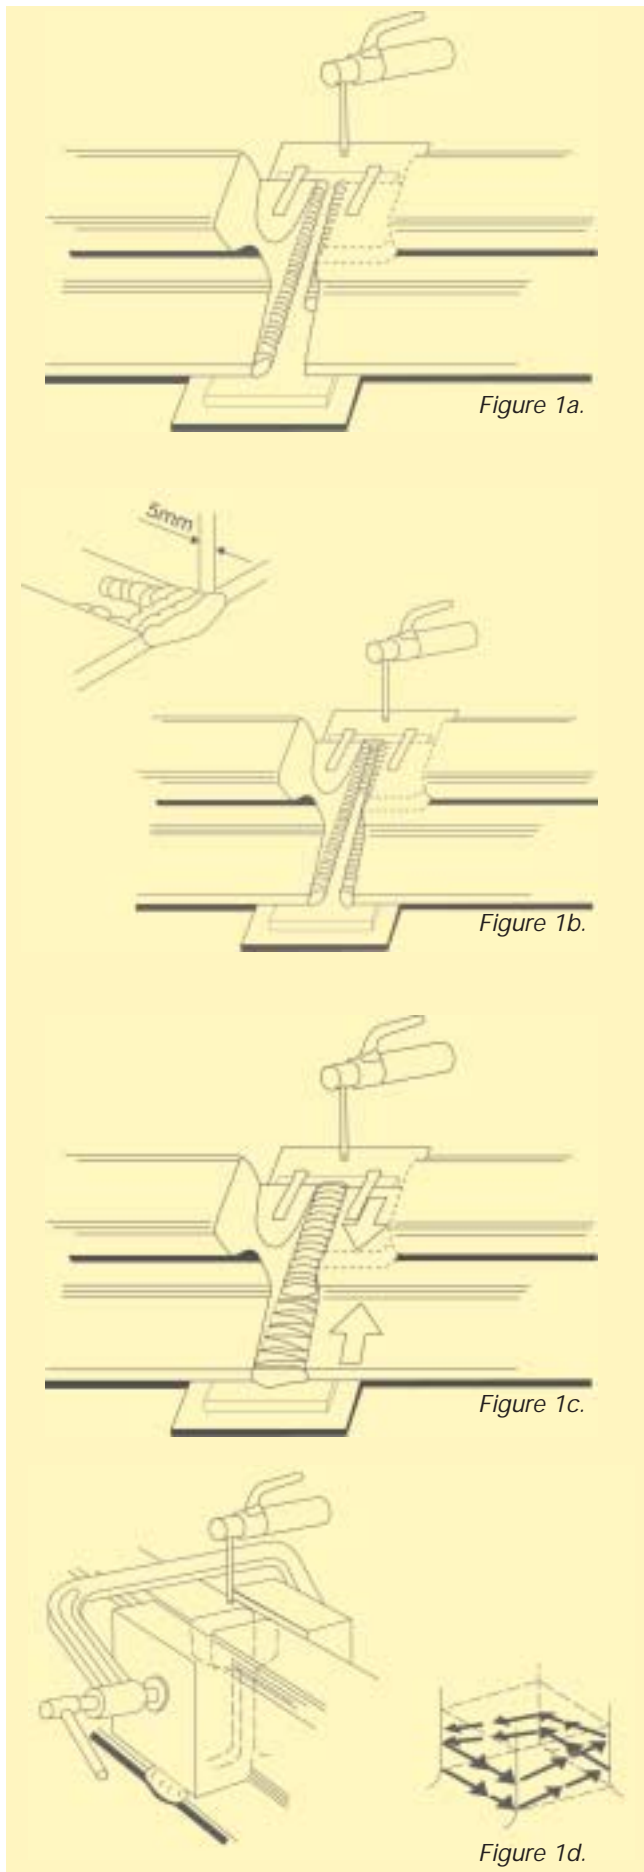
Enclosed welding in steps, as explained in the text. 1a. and 1b.: Welding the root onto the rail foot. 1c. Completing the foot. 1d. Mould welding.
